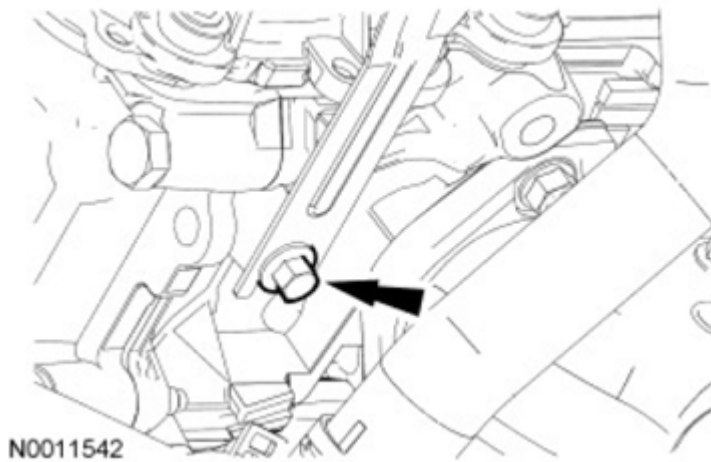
Locating Front Oil Level Indicator Tube Bolt
